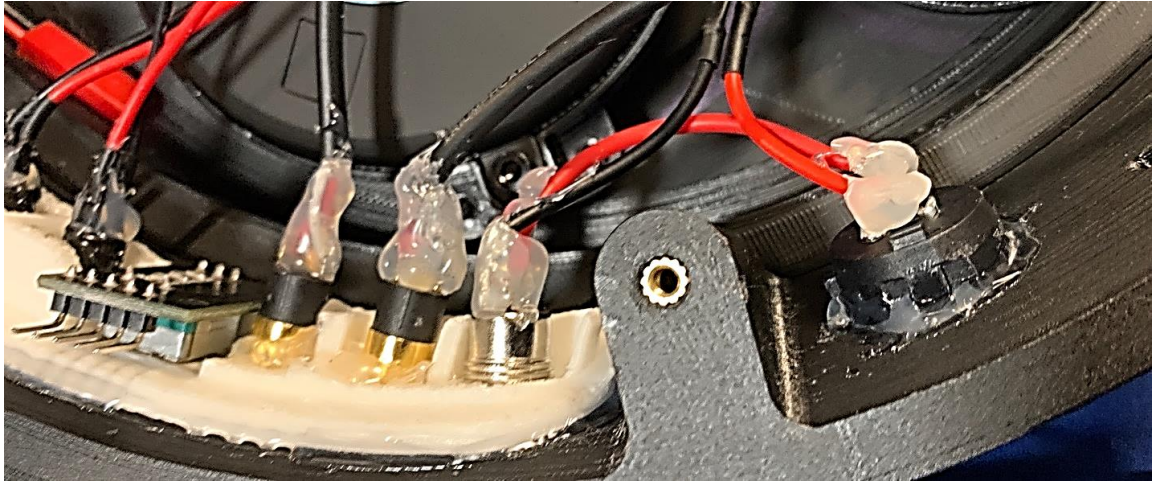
Interior view of fully assembled RX300 I/O panel, missing header pins to digital encoder
